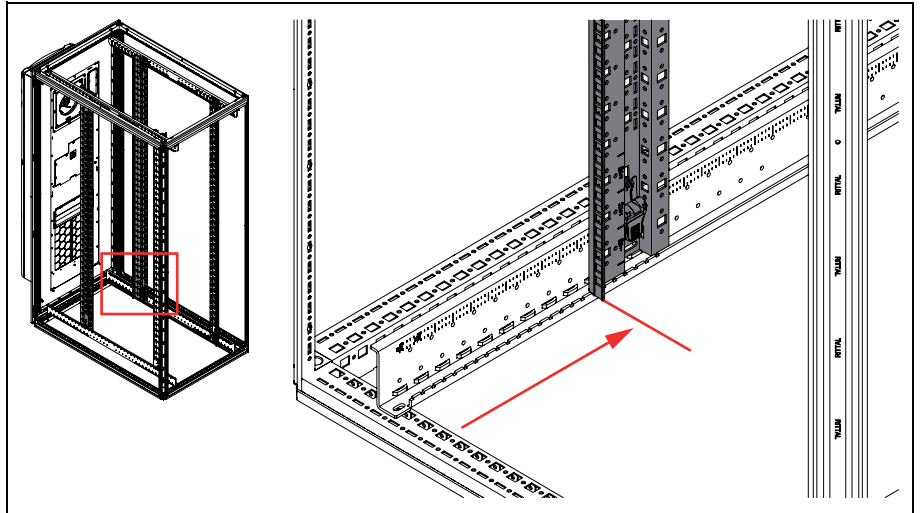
Adjust the rear 482.6 mm (19") mounting angle
